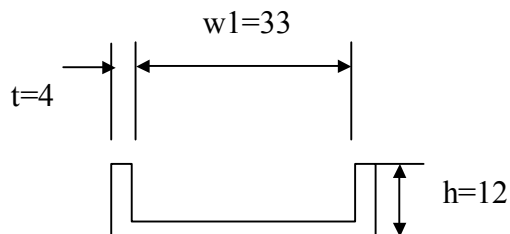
Detail dimension of “C” beam. (All dimension in mm)
